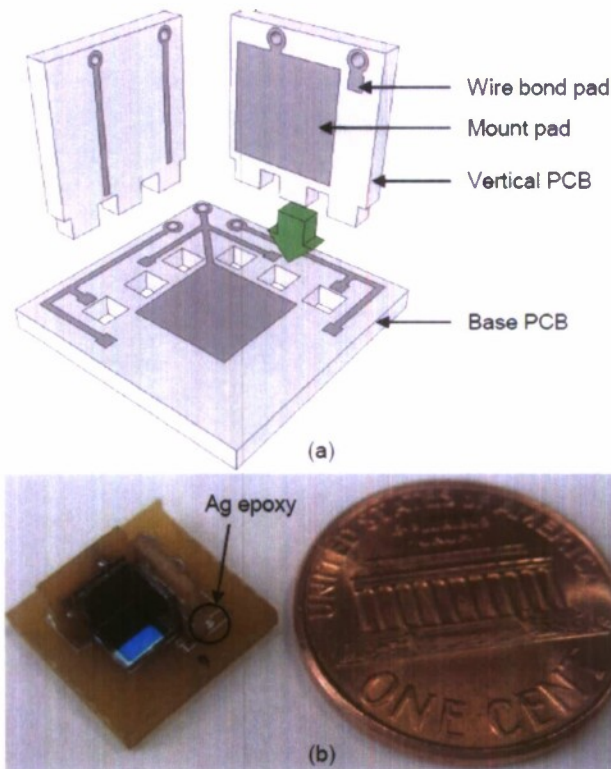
(a) Pronged PCB schematic. The vertical board on the left is rotated by 180° to illustrate the back side metal traces. (b) The PCB-based retromodulator module with the MQW devices die bonded on the boards.
